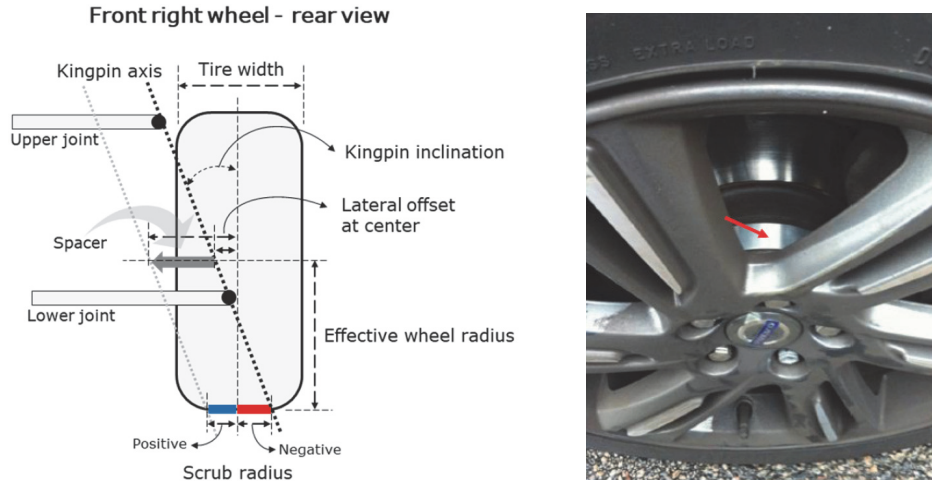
Diagram of scrub radius and spacer installation according to mechanical steering geometry
